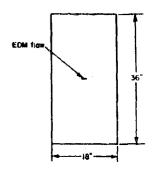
SHEET FRACTURE TOUGH-NESS SPECIMEN
